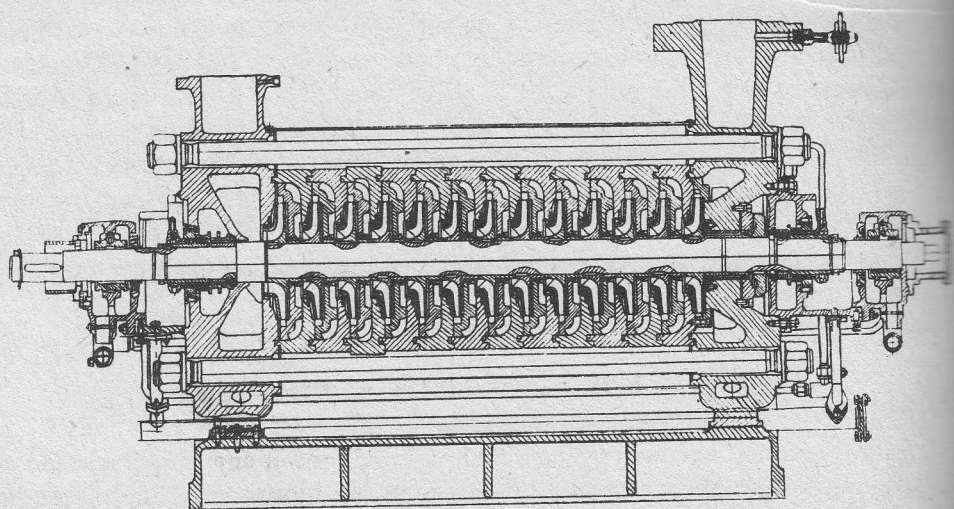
Type PE250-180 (USSR) impeller pump with sectional casing
